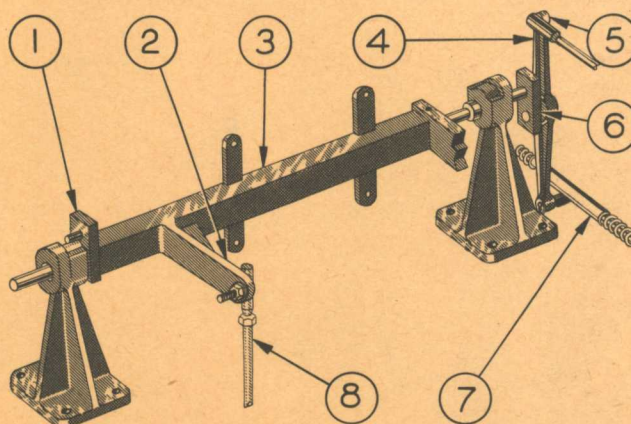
Bank Turner Assembly (without Spin Trip Assembly)
